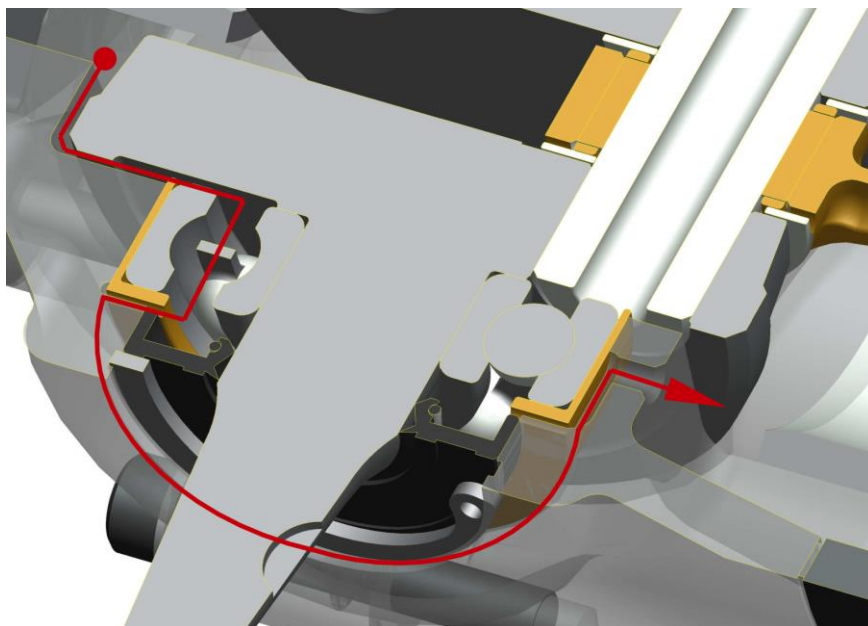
LUBRICATION PATH OF FUEL-OIL MIXTURE THROUGH MAIN BEARING.
